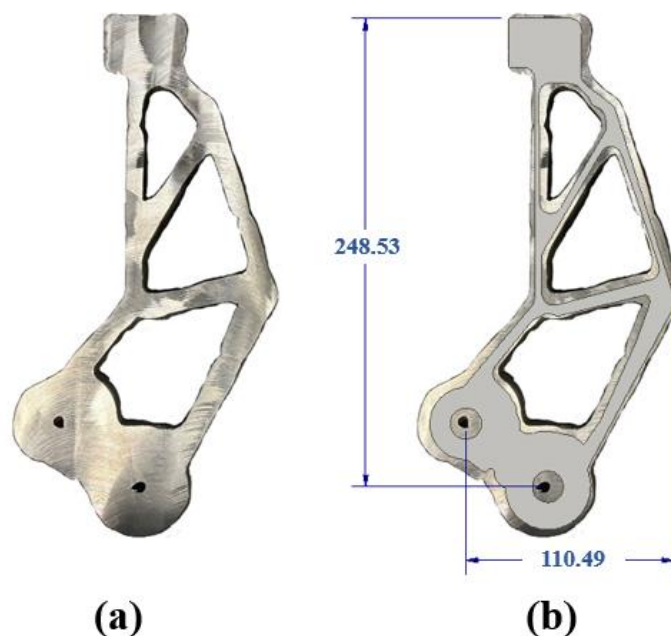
Jaw Gripper: (a) Top view photo of the machined part; and (b) the 3D CAD model superimposed the machined part (dimensions in mm)
